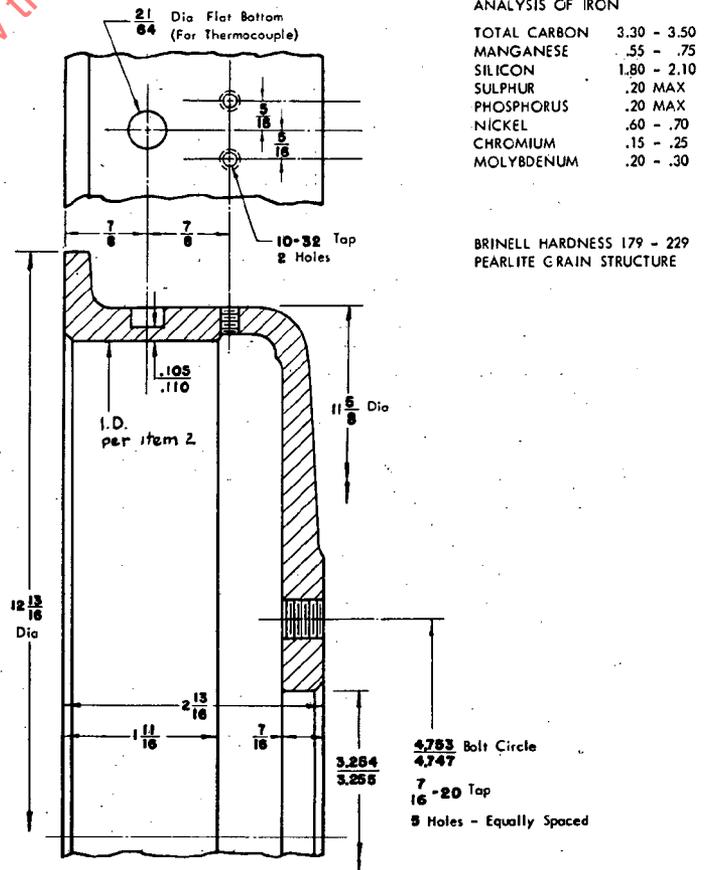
FRICTION MATERIALS TEST MACHINE DRUM
